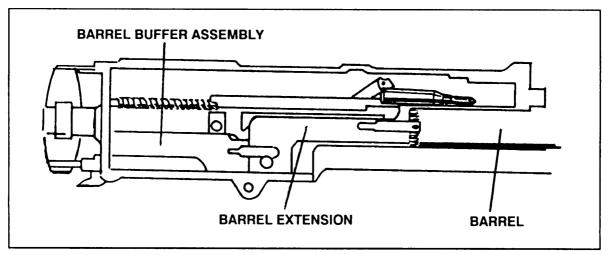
Unlocking – barrel and barrel extension stopped by the barrel buffer assembly.
